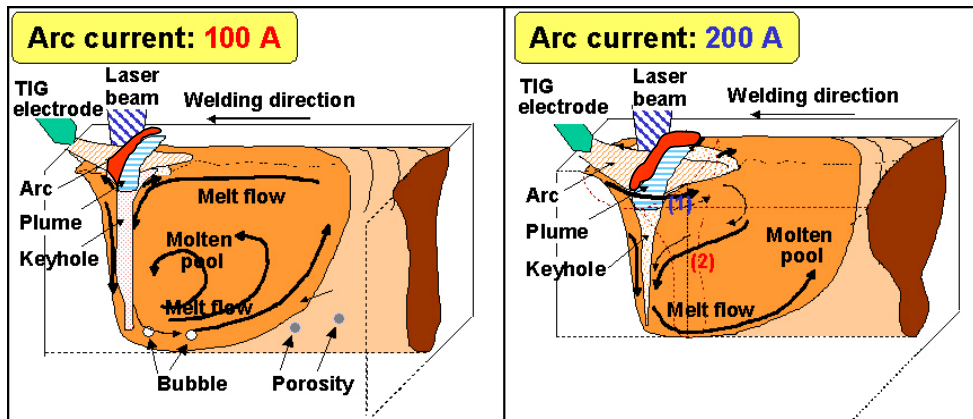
Schematic representation of TIG-YAG hybrid welding phenomena, showing keyhole, plume, concave surface, melt flows inside molten pool leading to weld geometry.
